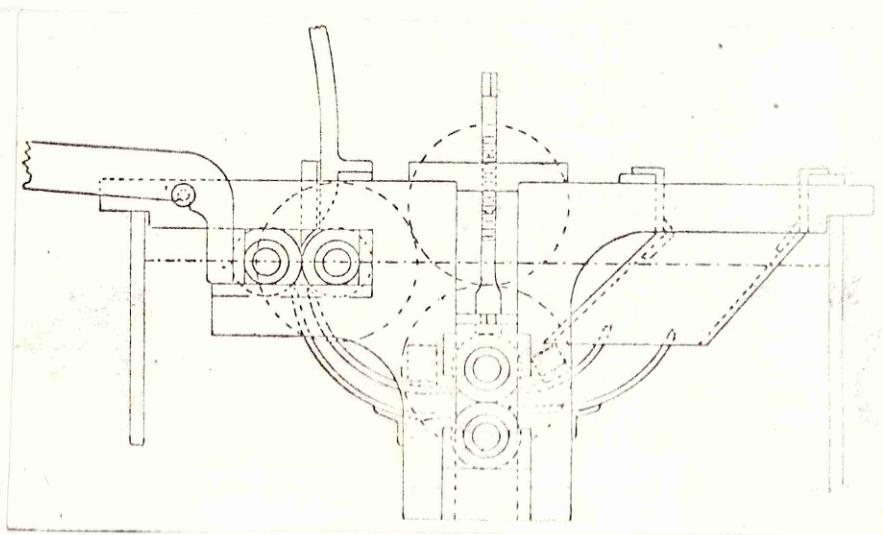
SIDE VIEW OF AN ENGLISH GALVANIZING
